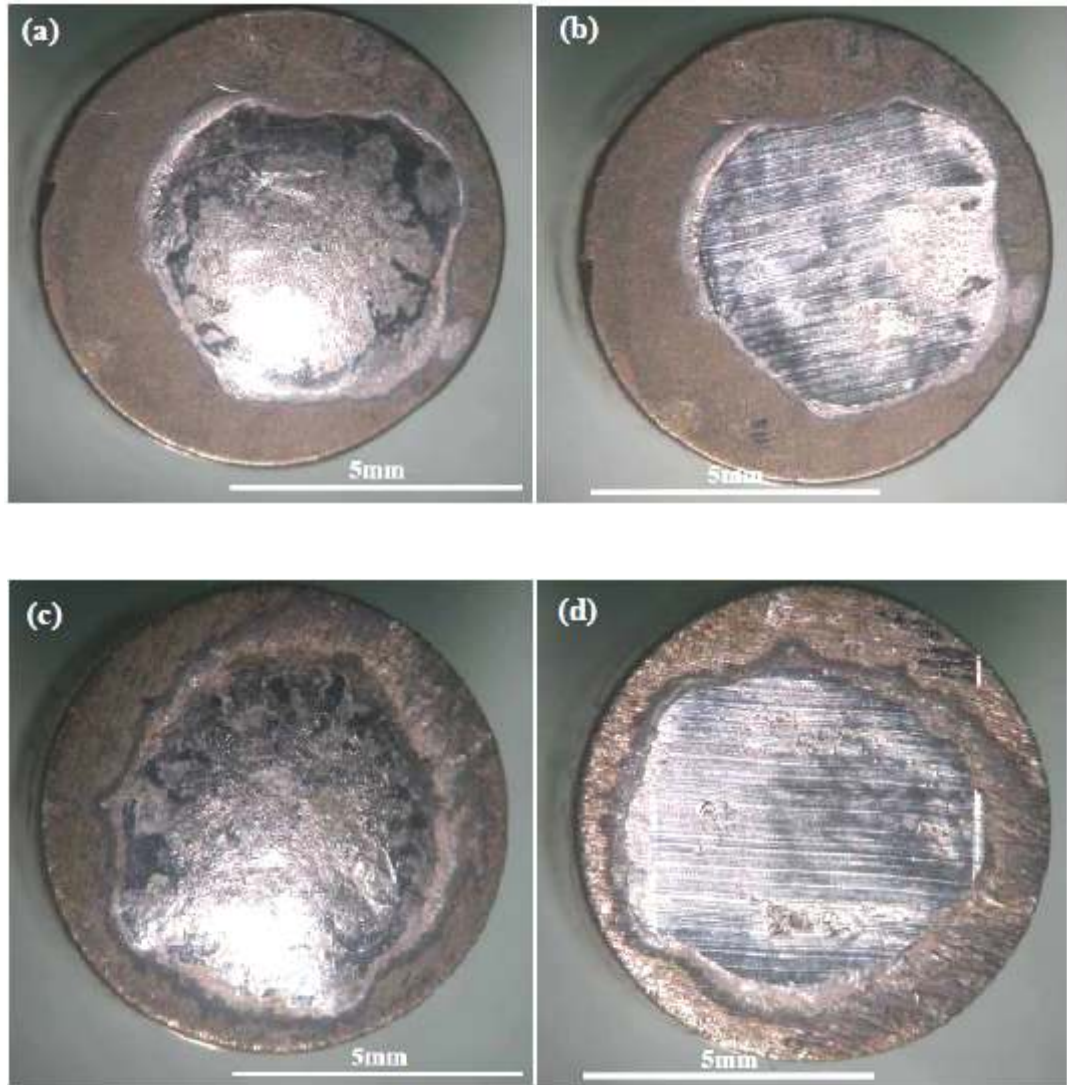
Macroscopic images (top view) of stabilized Sn-3Ag-0.5Cu solder on (a) smooth Fe-Ni surface (c) rough Fe-Ni surface. Macroscopic images (top view) of sheared Sn-3Ag-0.5Cu solder on (b) smooth Fe-Ni surface (d) rough Fe-Ni surface
